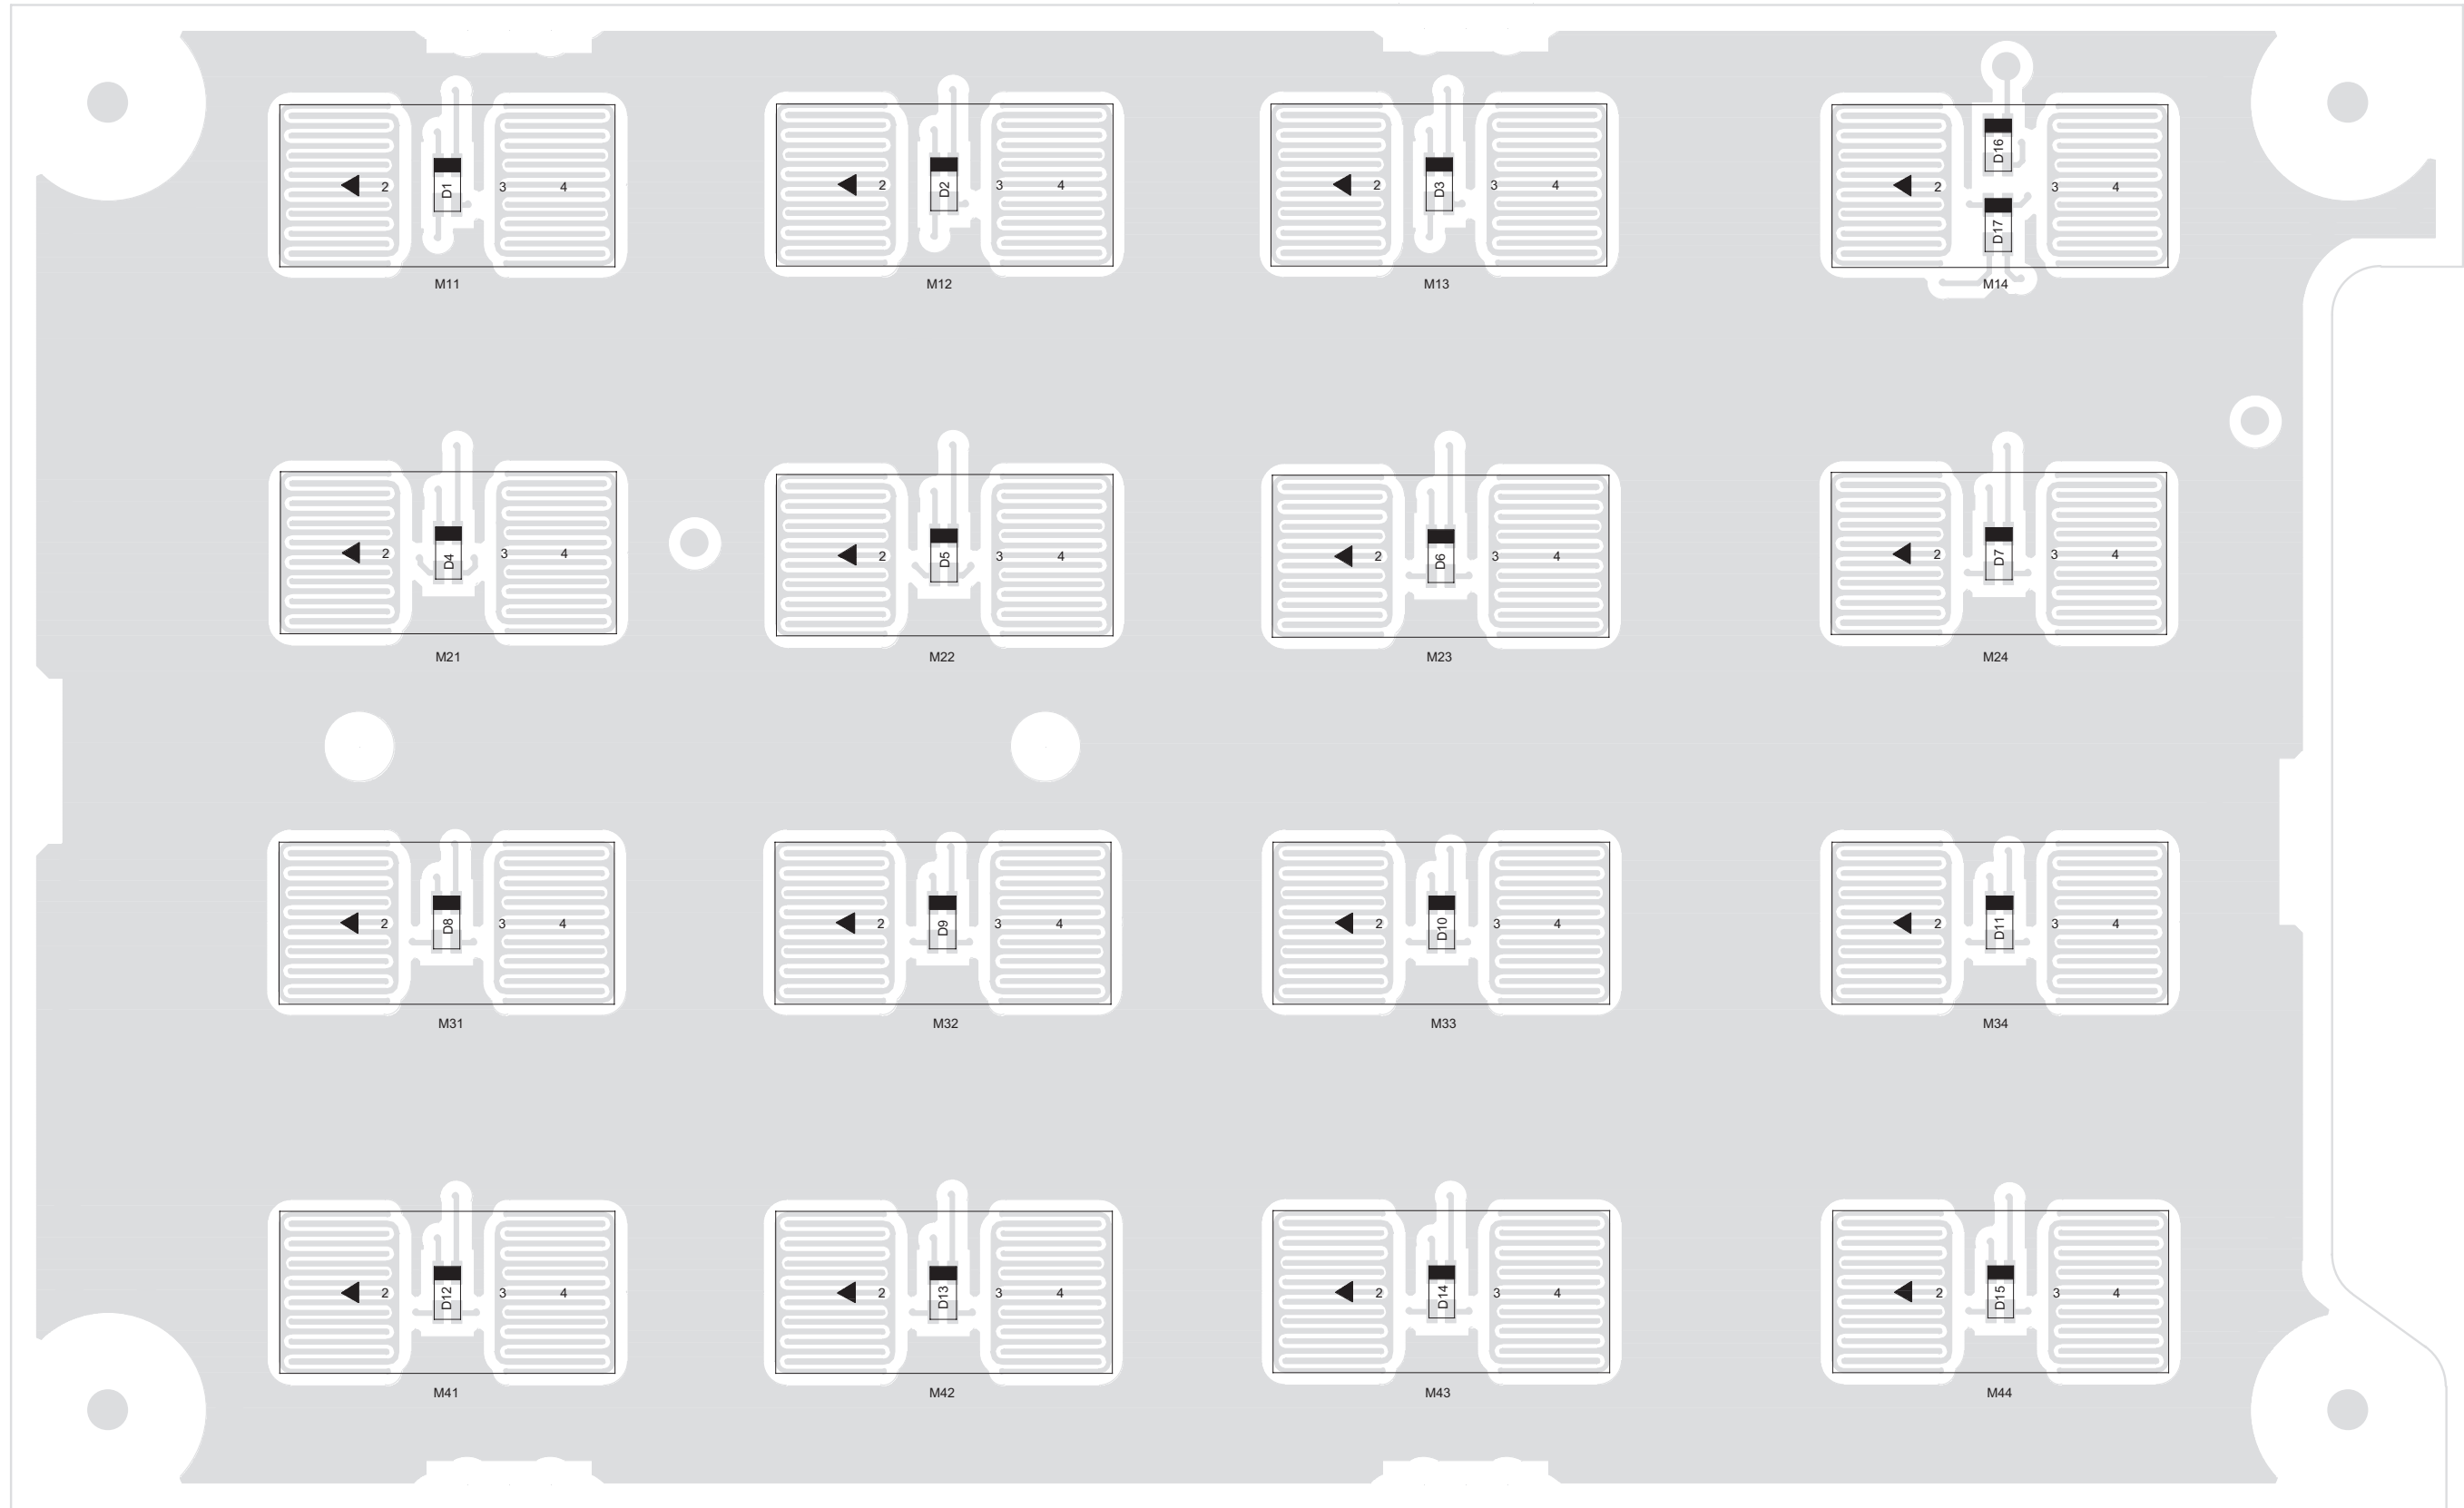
PPLN1693A Keypad Circuit Board Layout - Side 1
